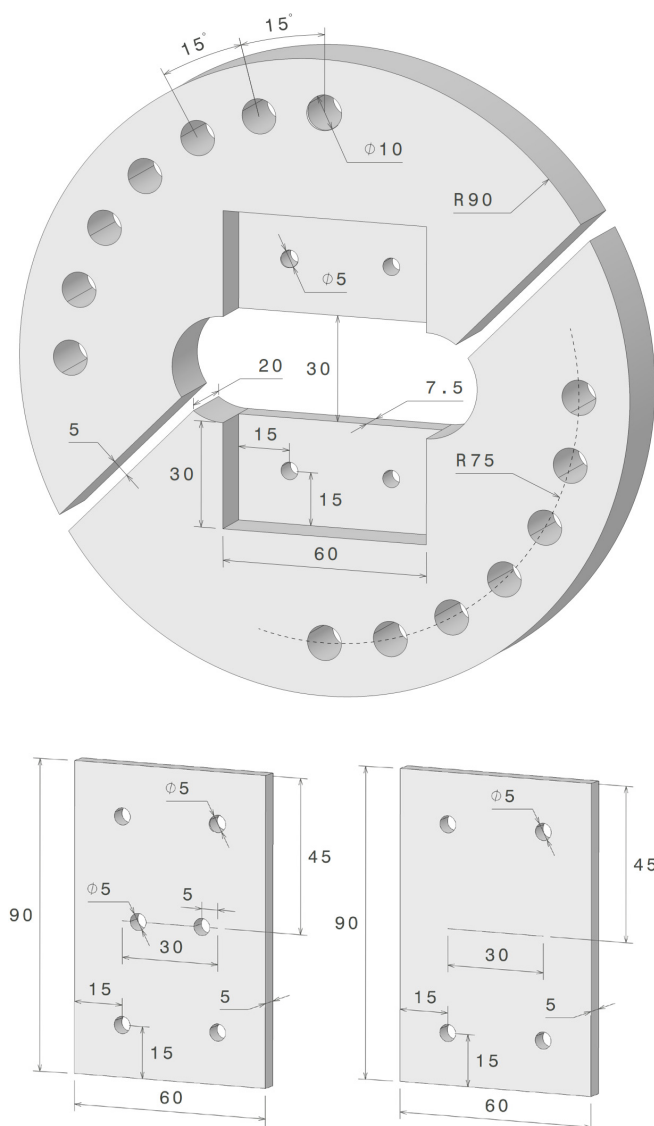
The geometry and dimensions of modified Arcan fixture and test specimens in millimeter
